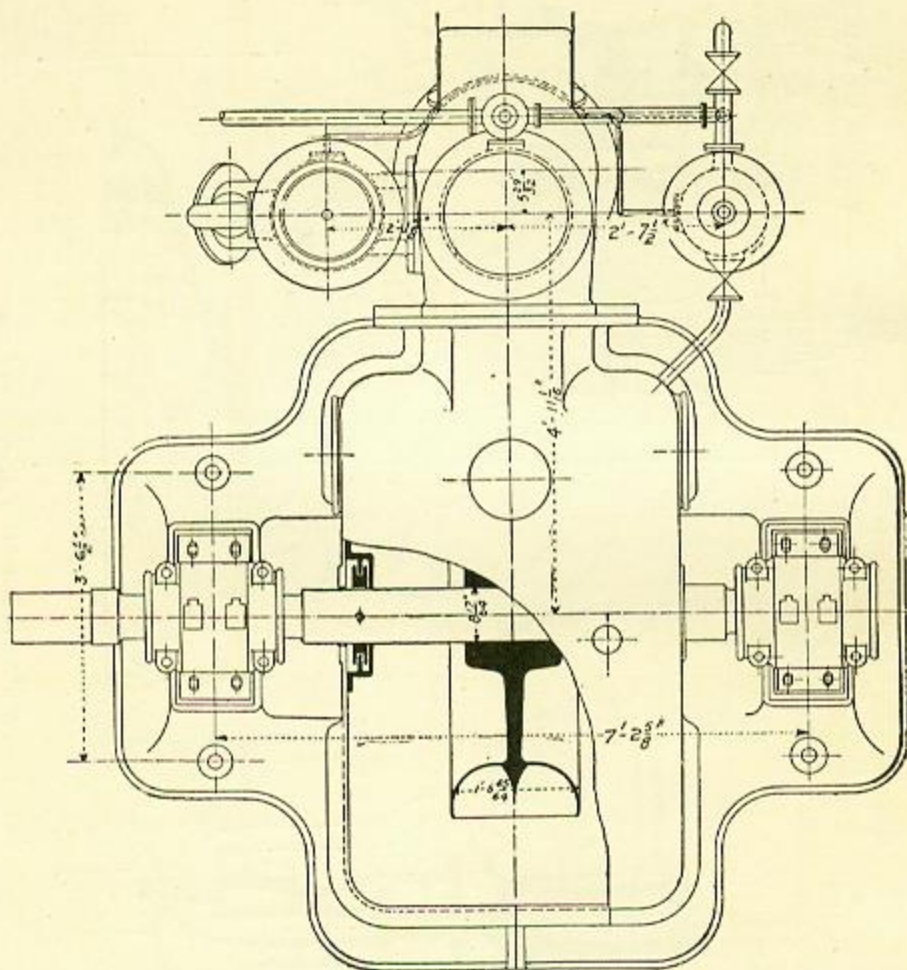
Plan View of Wheel shown on Fig. 38.
